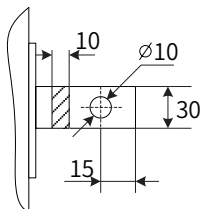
Dimensions of Jianli series 250–800 A filter (unit: mm)
